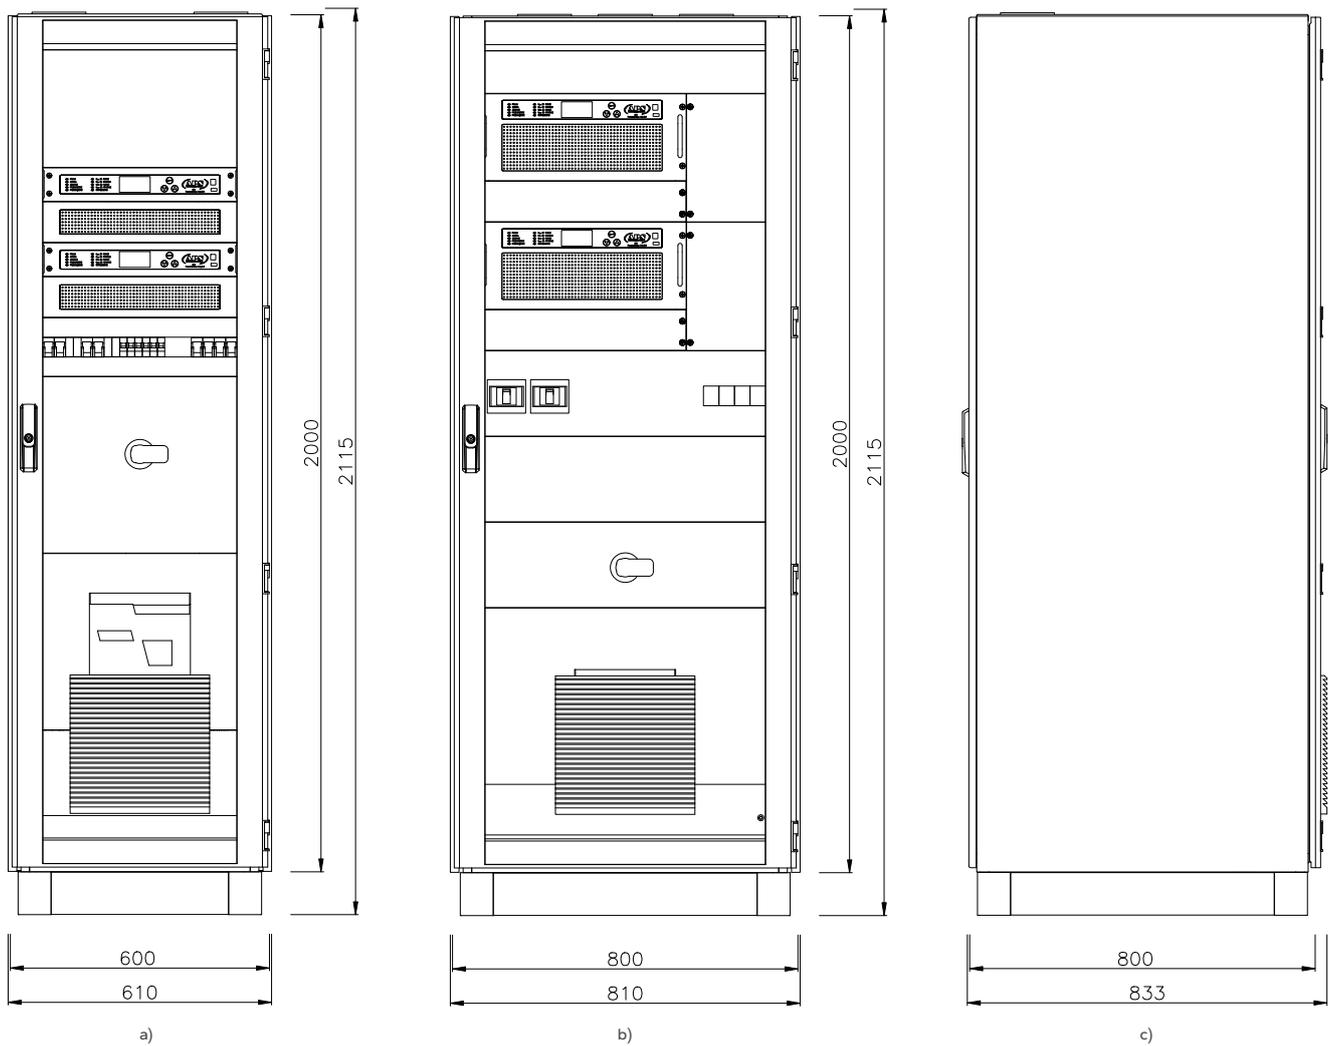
Views with dimensions of the EPI / EPis converter cabinet:
